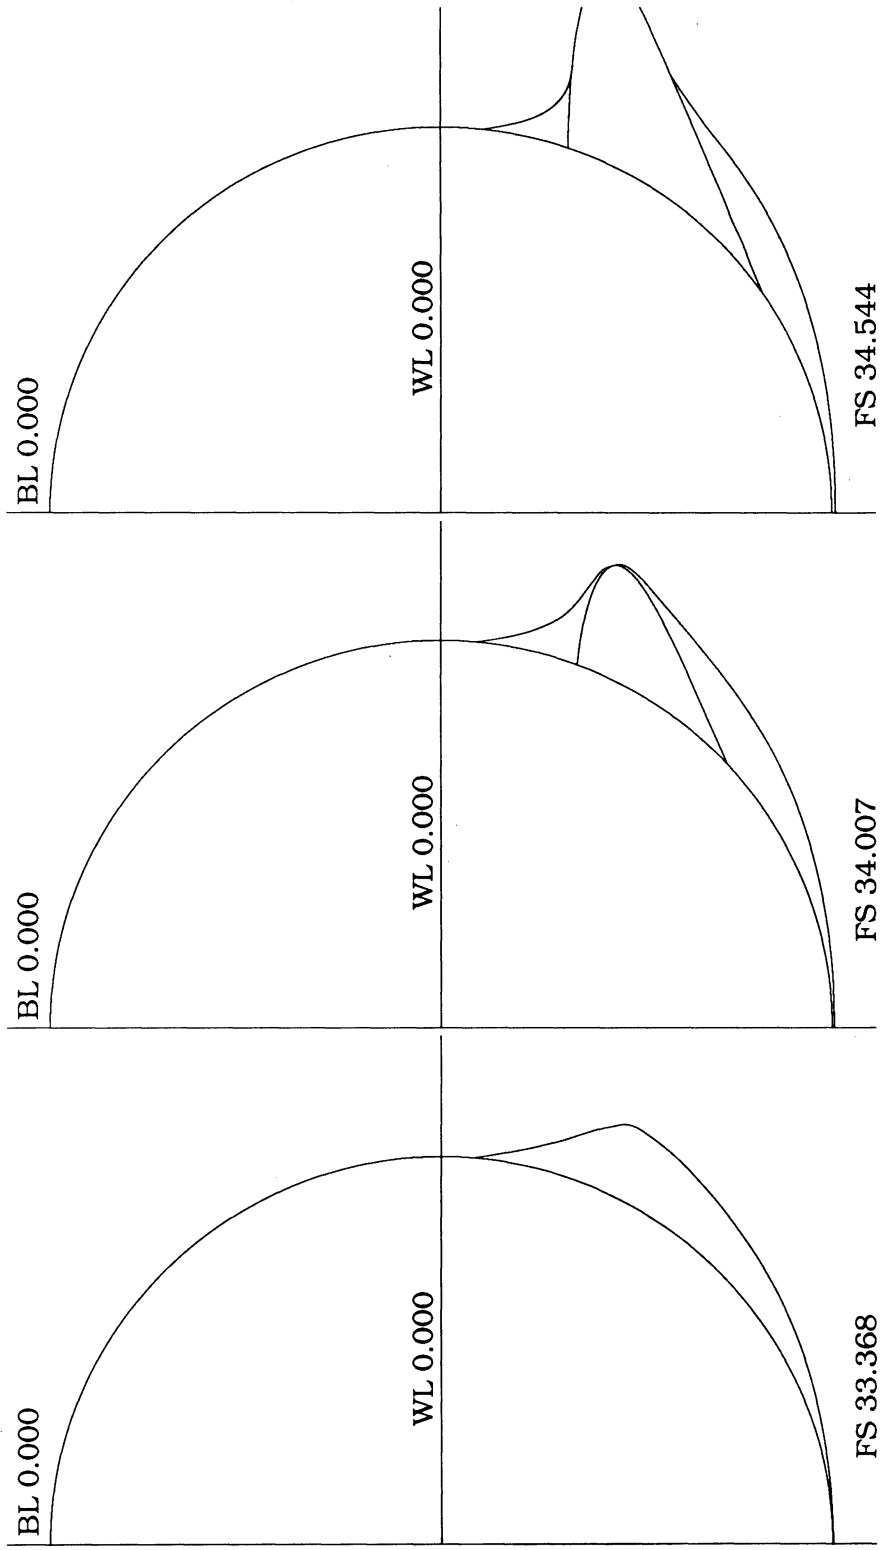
Details of wing-fuselage fillet. Linear dimensions are in inches.
